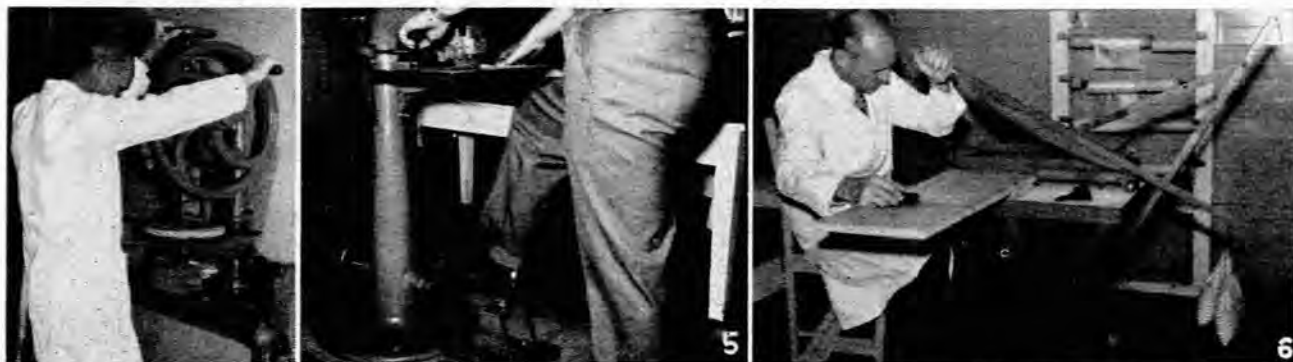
Old drill adapted for cutting jointing and gaskets. It provides arm and shoulder exercises.
